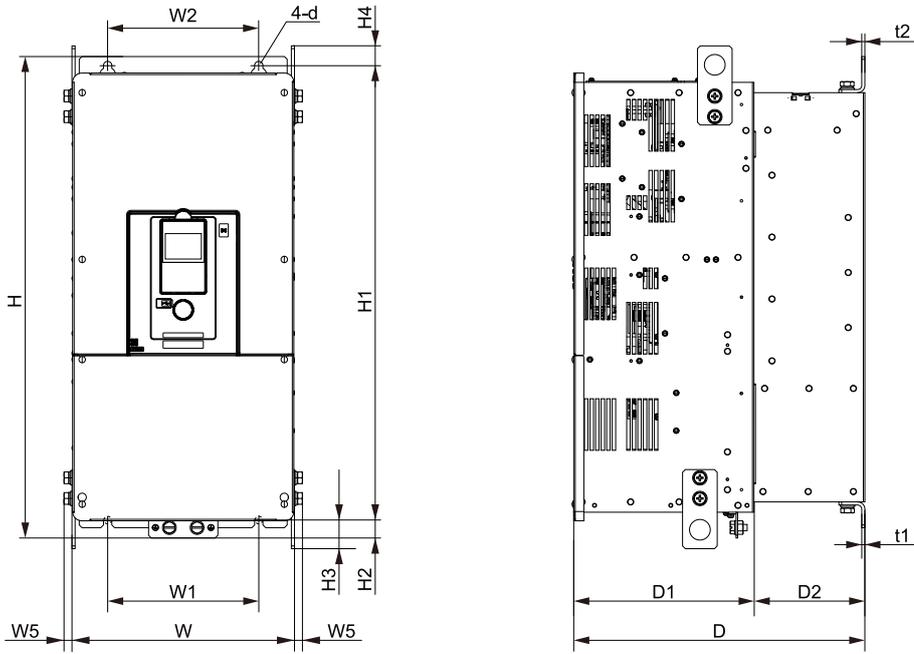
Exterior and Mounting Dimensions Diagram 7
